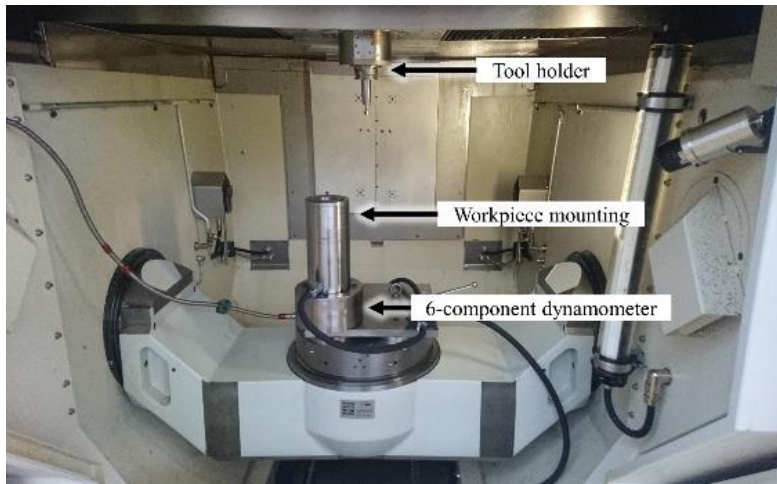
Experimental setup within the milling machining center LPZ 900 from MAP Werkzeugmaschinen GmbH, Magdeburg, Germany
